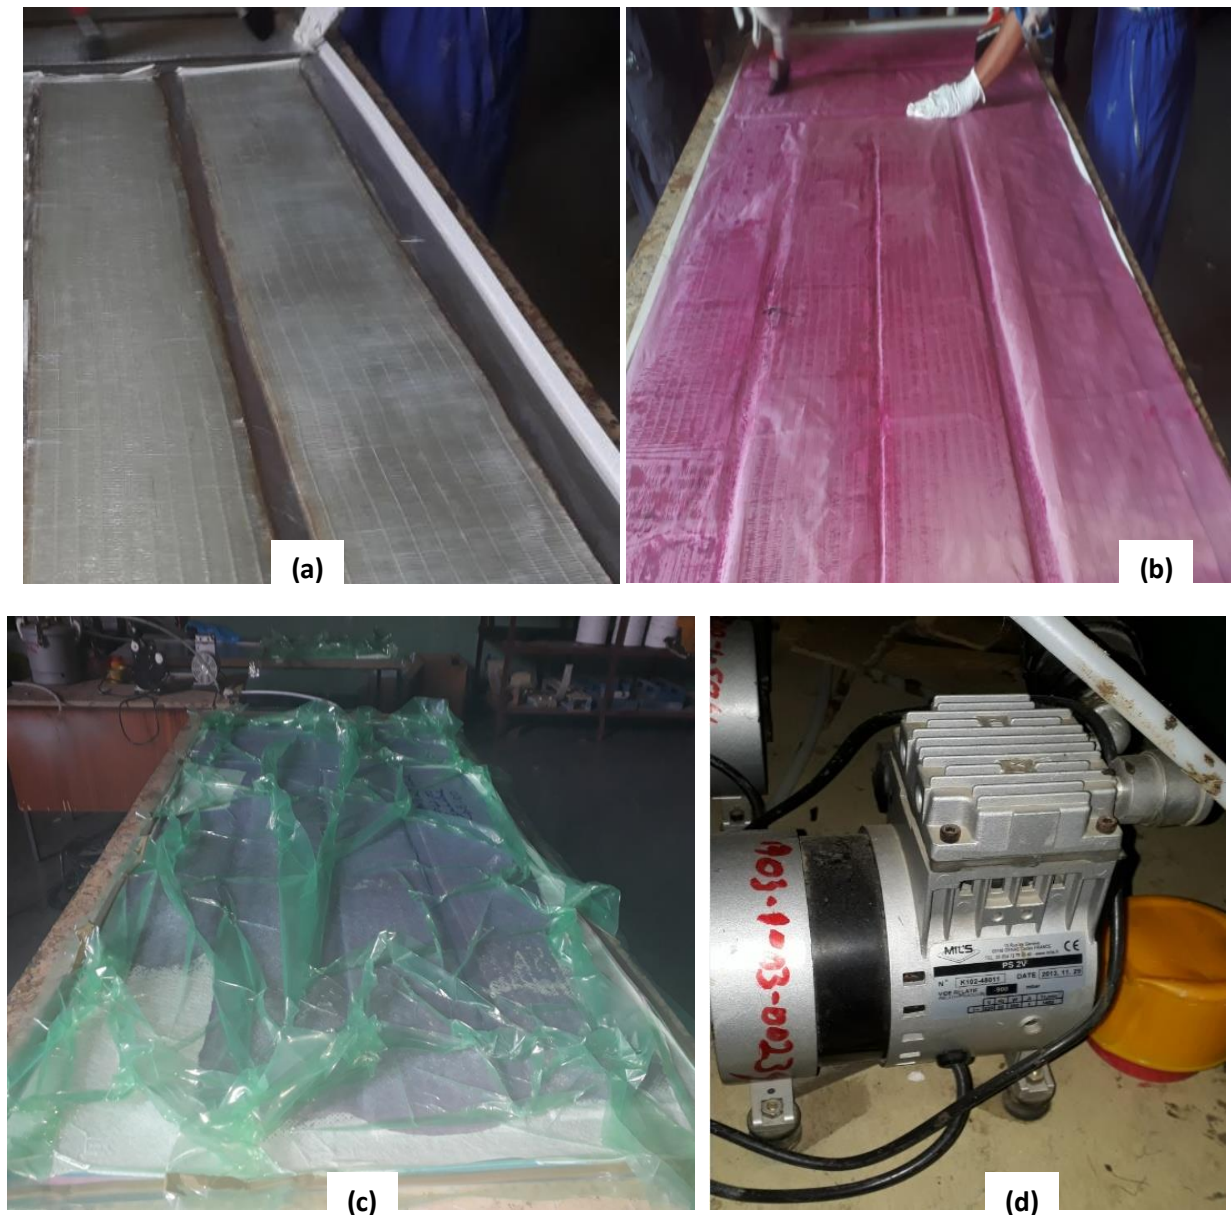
Specimen Preparation by hand lay-up using vacuum bagging
